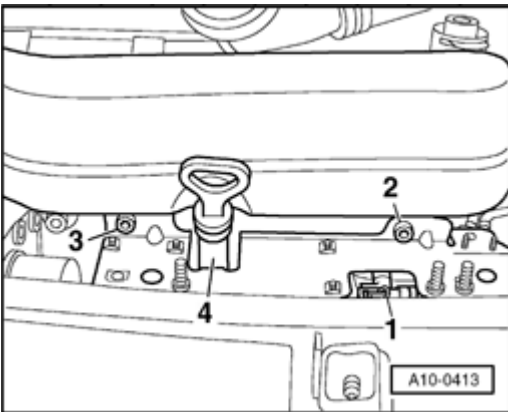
Identifying Electrical Change-Over Valve Connector, Intake Manifold Brackets & Dipstick Tube
